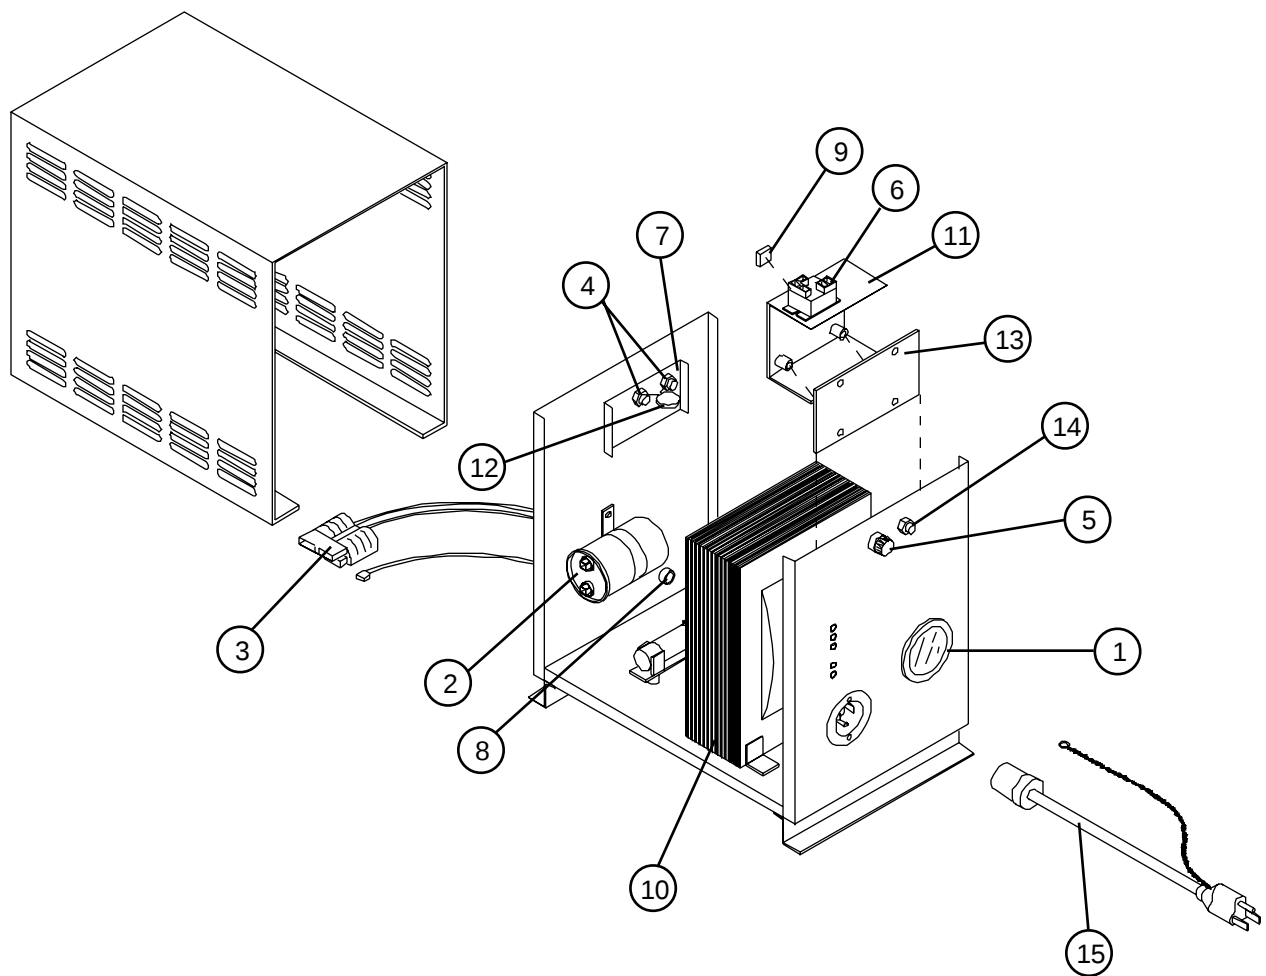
MOTOR CONTROLLER PANEL ASSEMBLY
